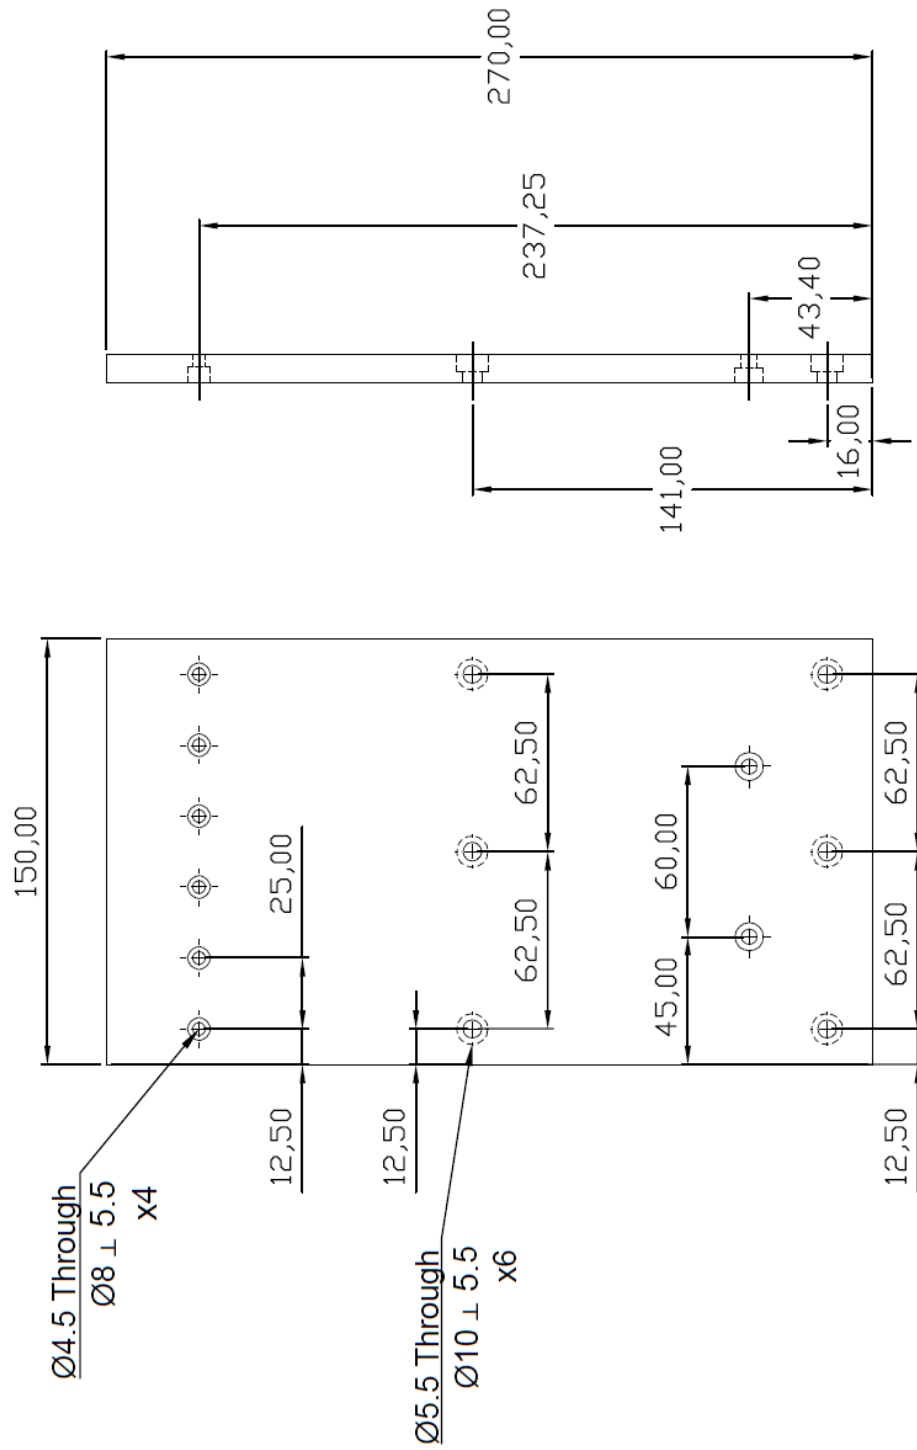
X axis to Y axis connection plate for lower linear stages. Material Al7060.
